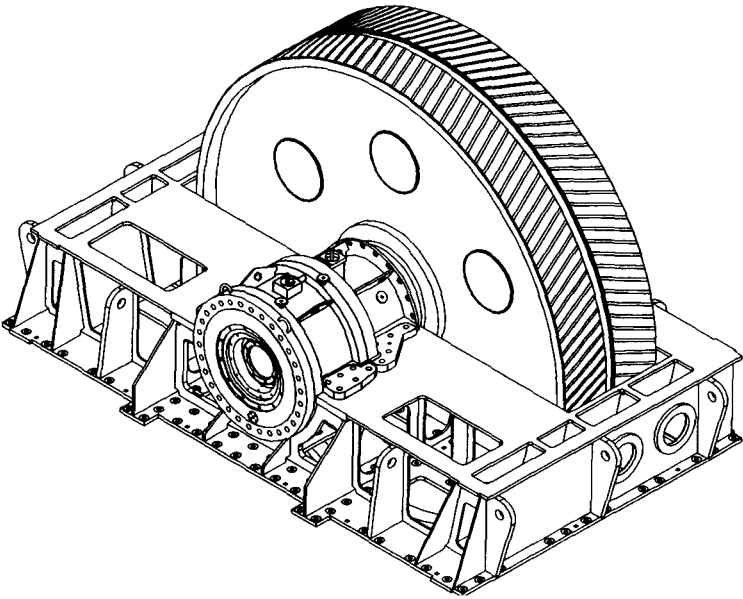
Second reduction gear assembled in the lower gear casing.
